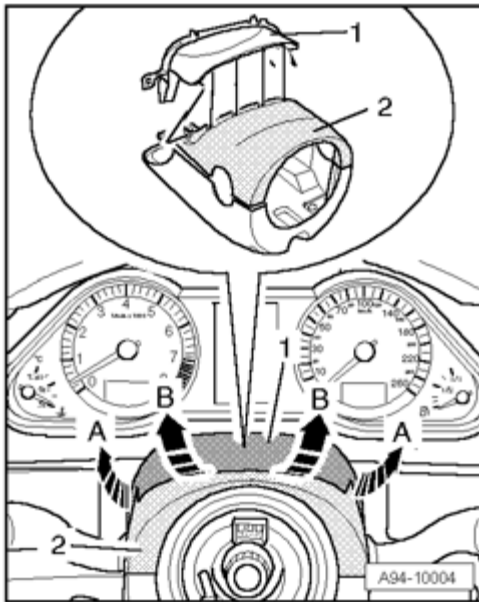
Releasing Gap Cover At Upper Steering Column Trim Using A Small Screwdriver
